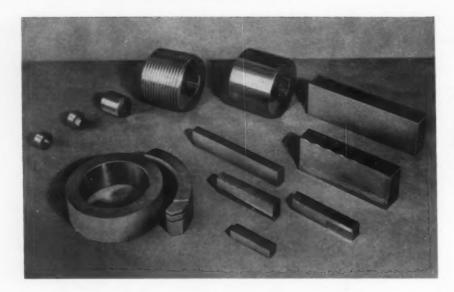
Some of the many types of thread-rolling dies being used. Included are flat dies, cylindrical dies and attachment rolls, and a circular die and segment for a planetary machine.
